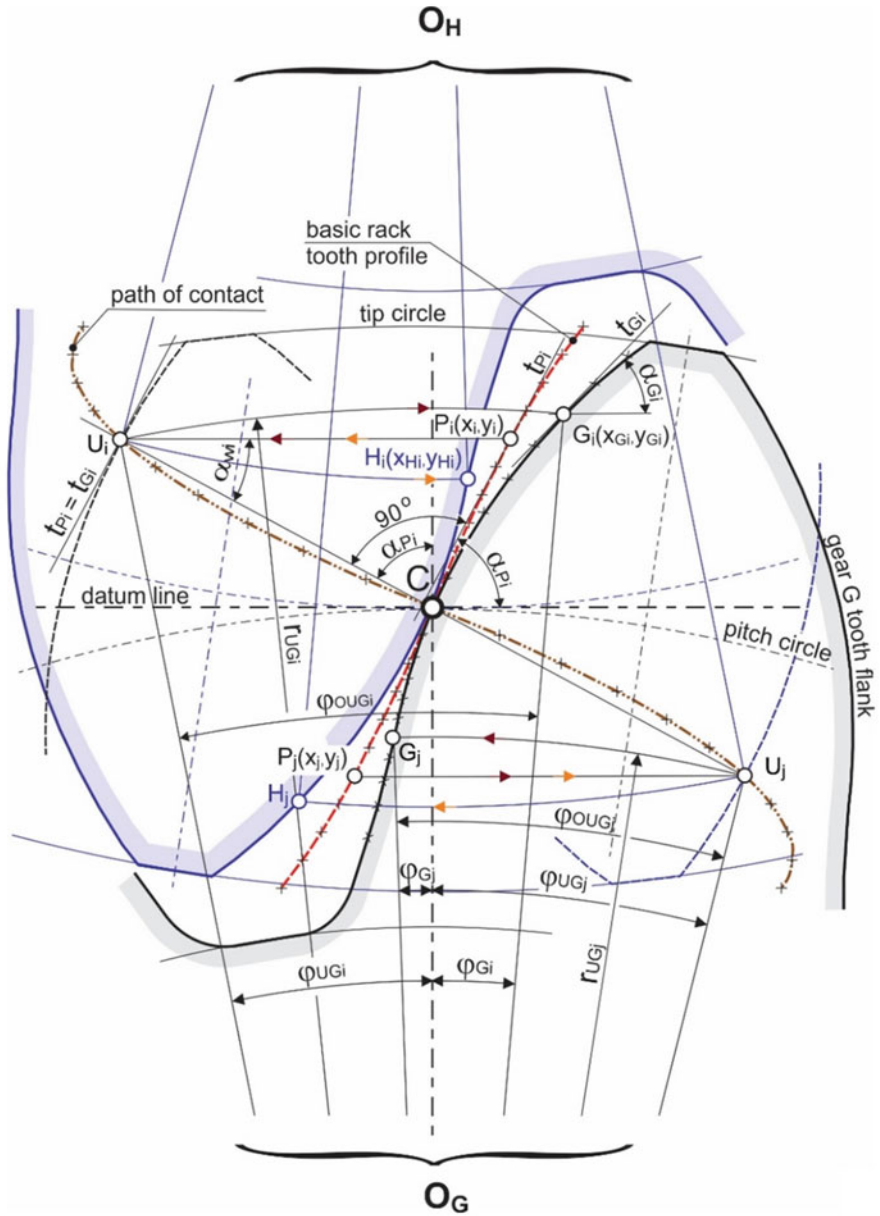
Design of the path of contact, teeth flanks of both gears based on the rack profile [2]
